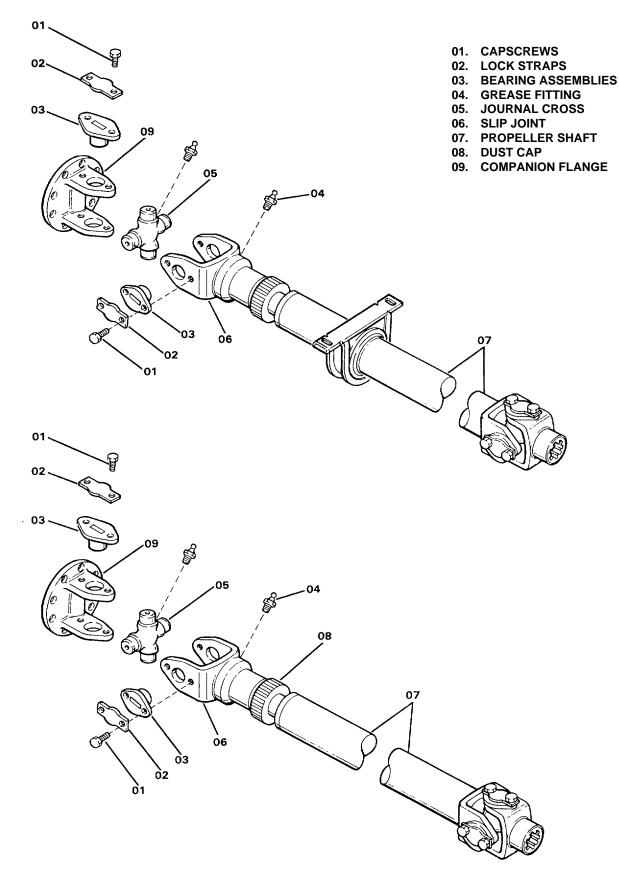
E-3. Propeller Shaft (10U65 and 10U66)
